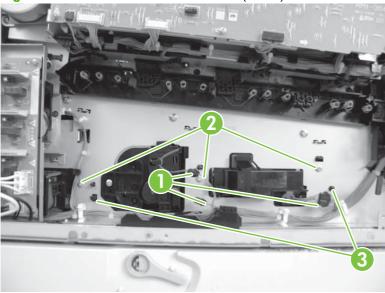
Remove the high-voltage power supply PCA (A) (3 of 3)
